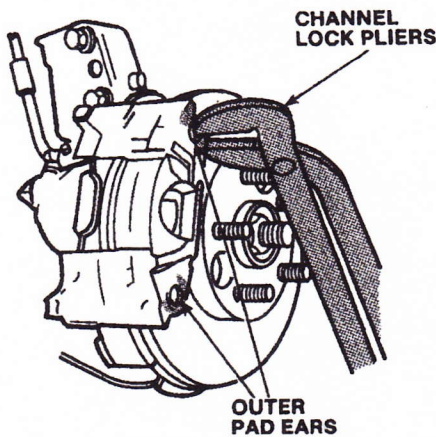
Clinching down pad ears with channel lock pliers.
